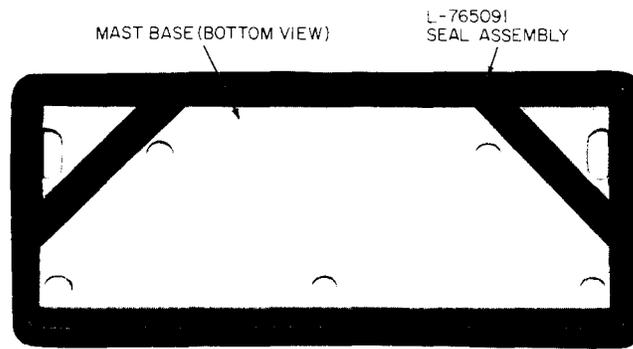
Bottom View of Mast Assembly Showing Correct Position of Seal
